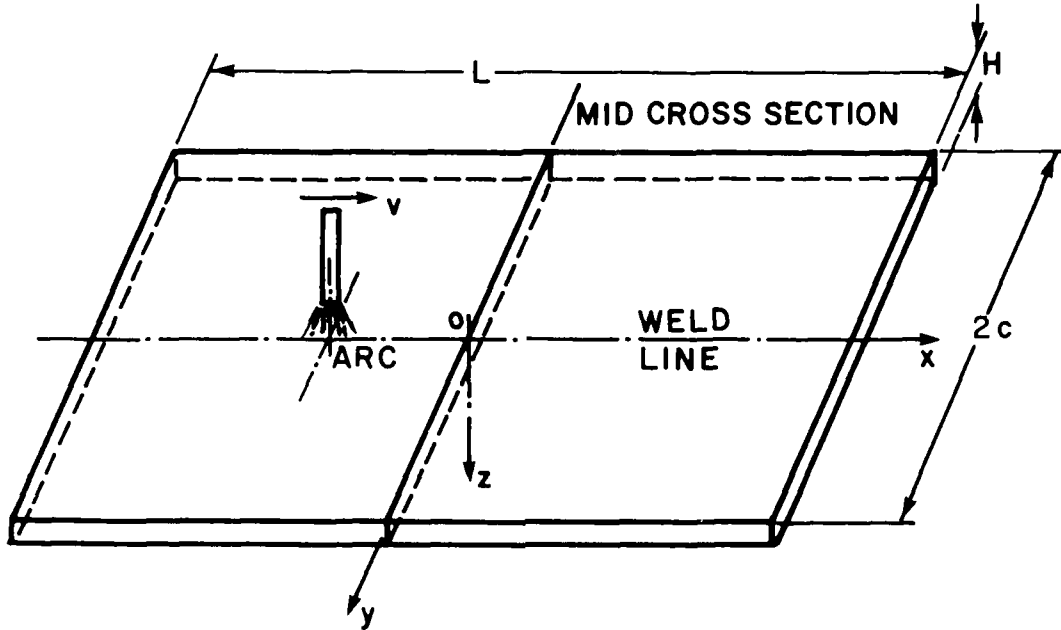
Weldment configuration (Butt welding of plates)
